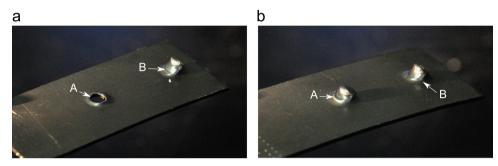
Failure modes of sheet samples in the single lap shear test with two joints produced with (a) the extensible die and (b) the fixed dies.
